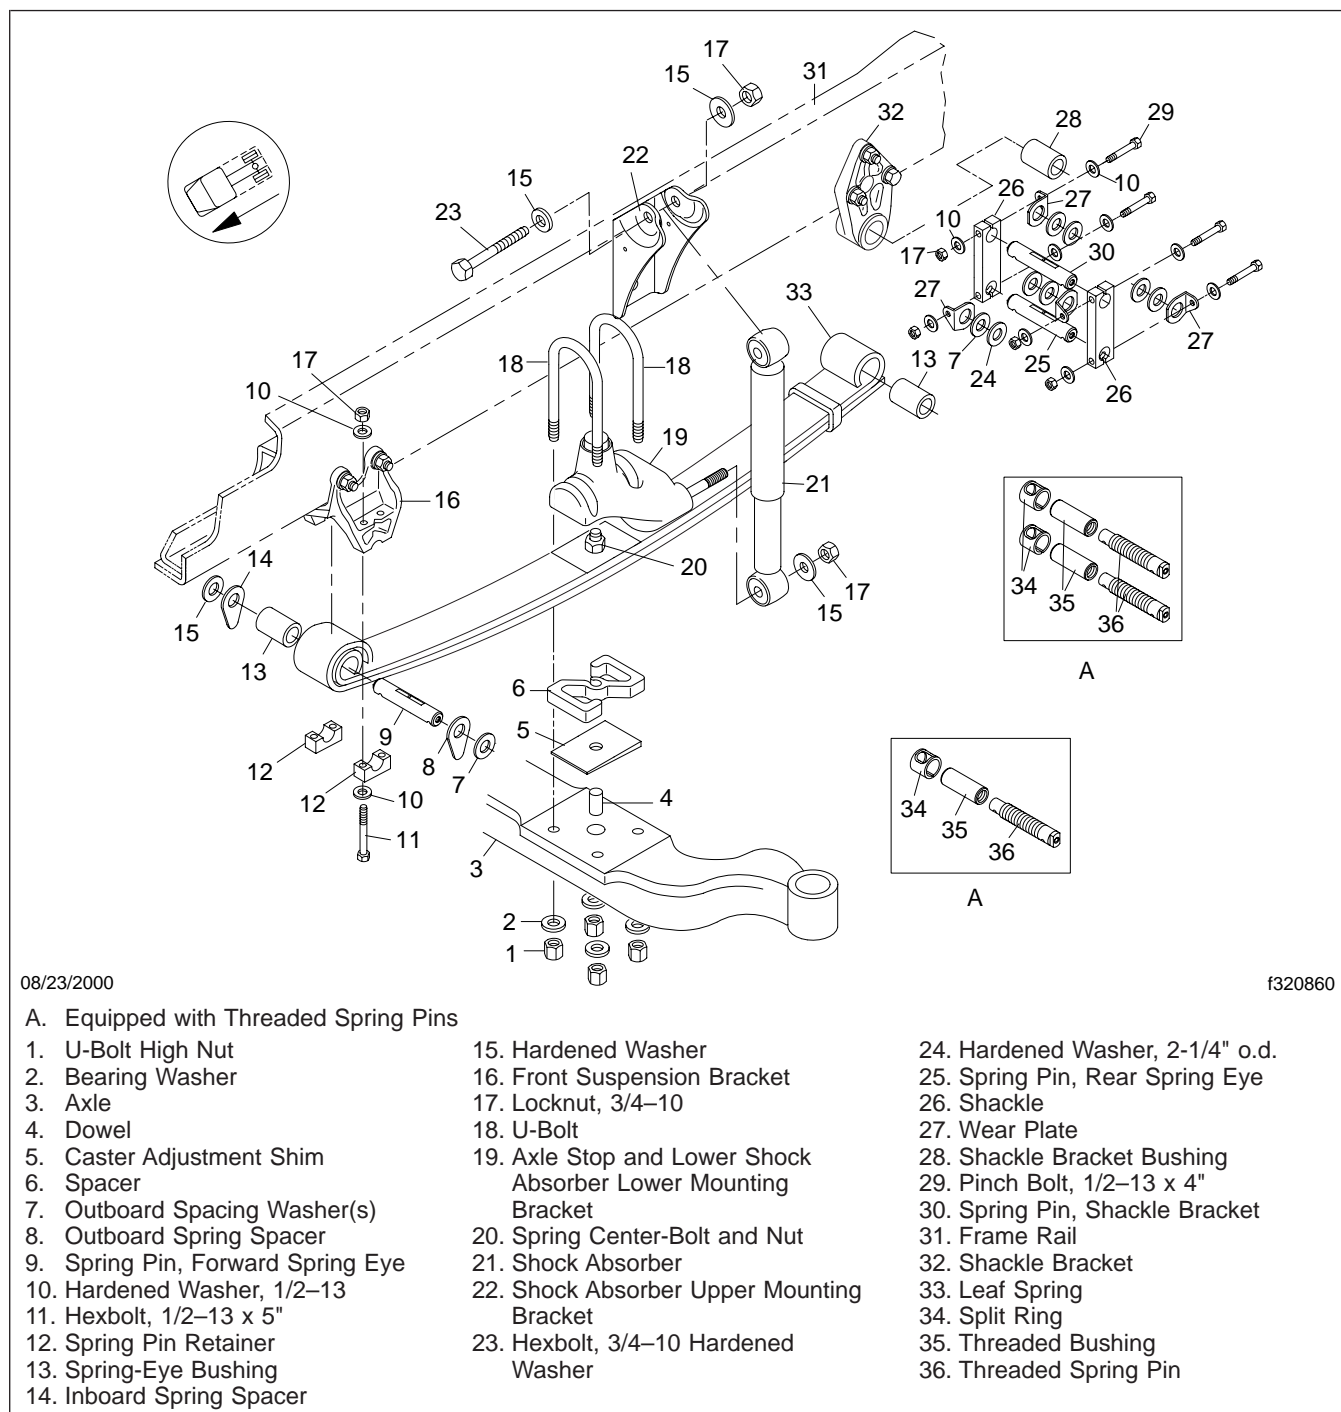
, Front Suspension with Bronze Bushings or Threaded Spring Pins
